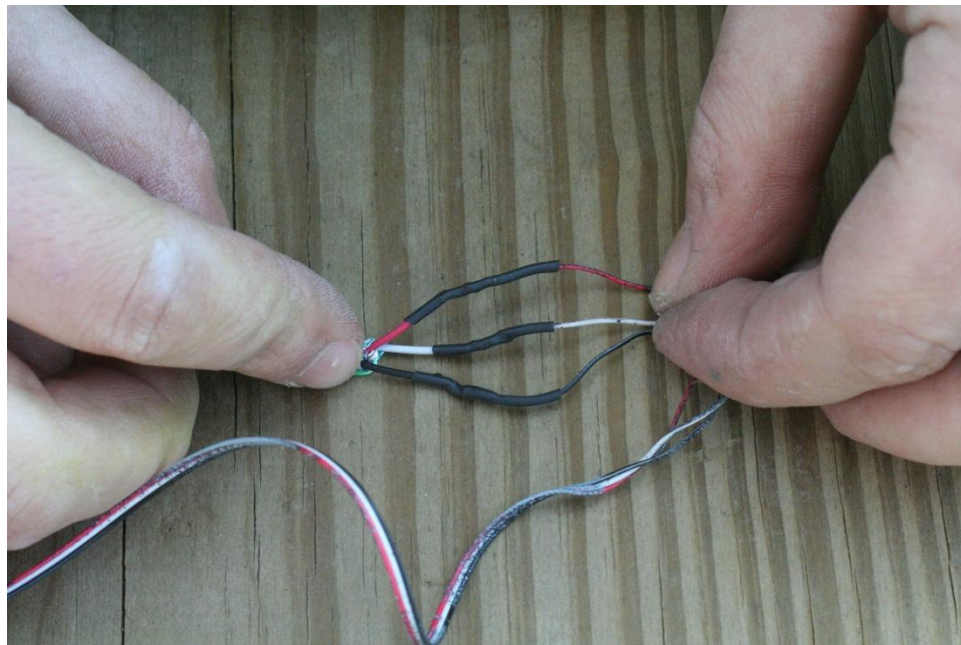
Heat Shrink Tubing Protecting the Soldered Splice Connection
